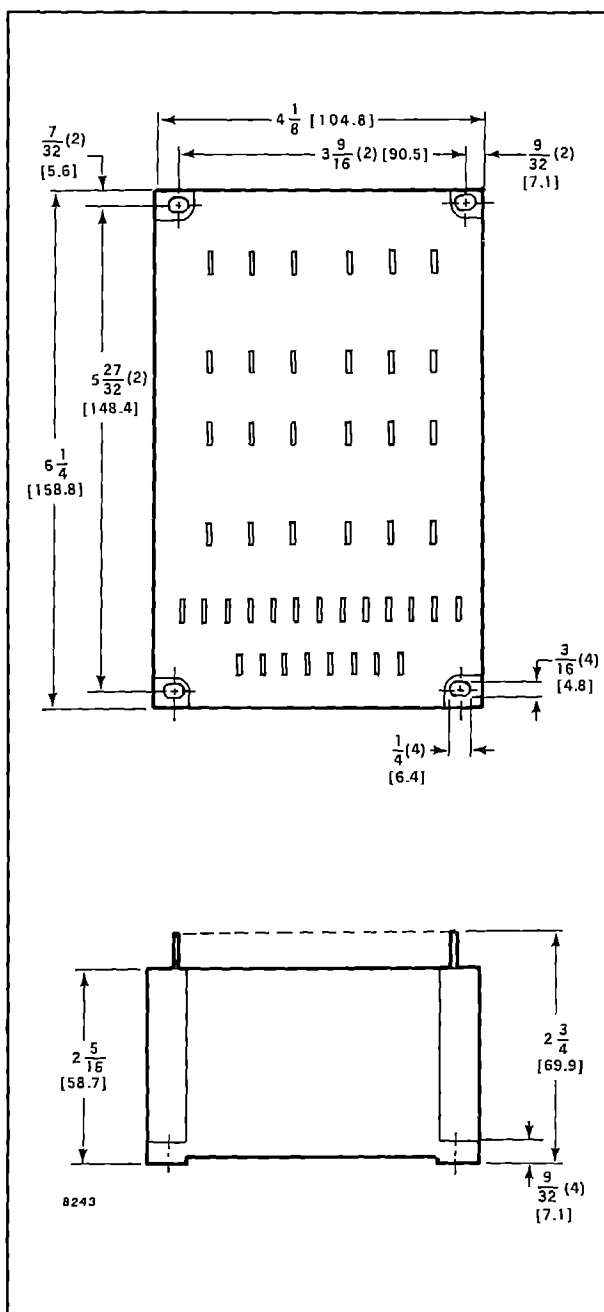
MOUNTING DIMENSIONS FOR W7080A, W7081A, W7082A, W7083A, W7084A UNITS IN IN. [mm IN BRACKETS].
